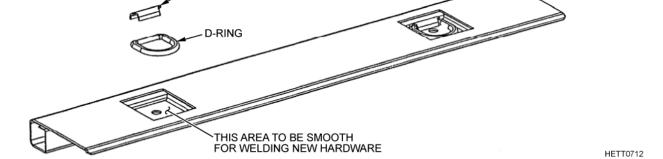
D-Ring Retainer and D-Ring Area to Be Smooth for Welding.
